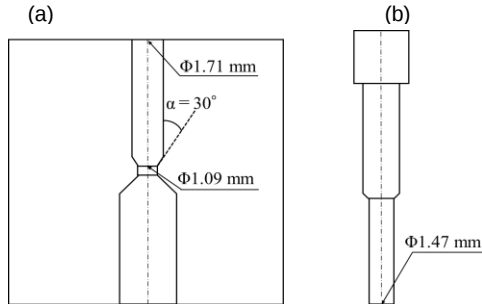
Dimensions of the (a) die and (b) punch [10].
